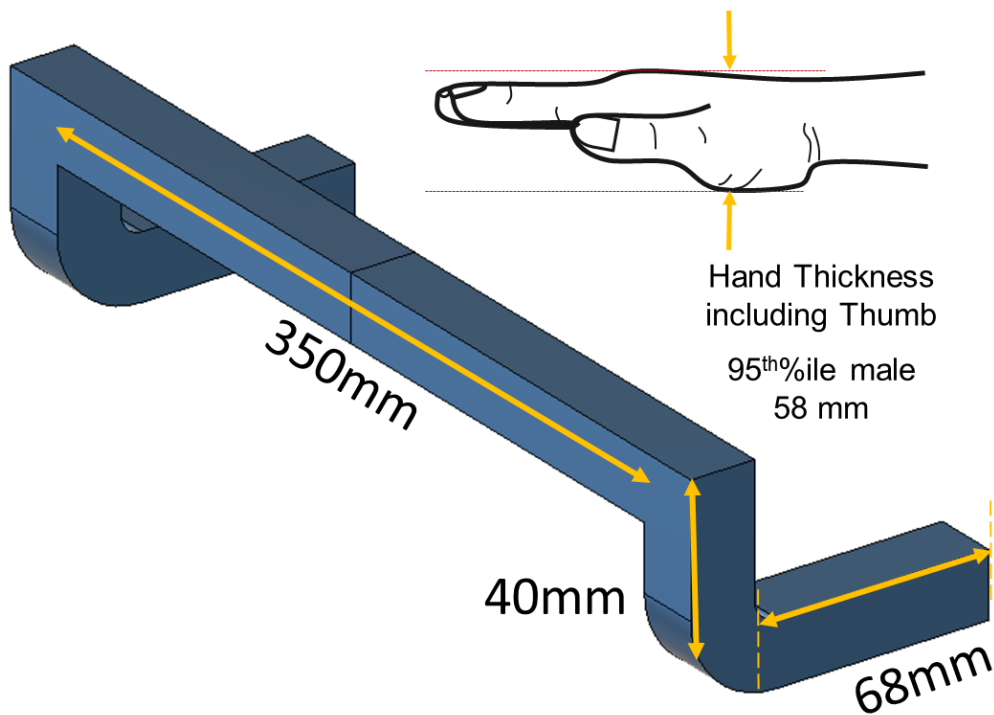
Prototype V: Libero – a handle with related hand dimensions
